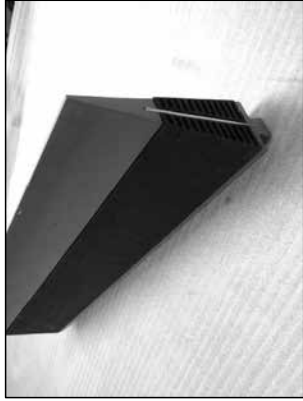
The two actuation flap elements assembled with the load carrying part.
